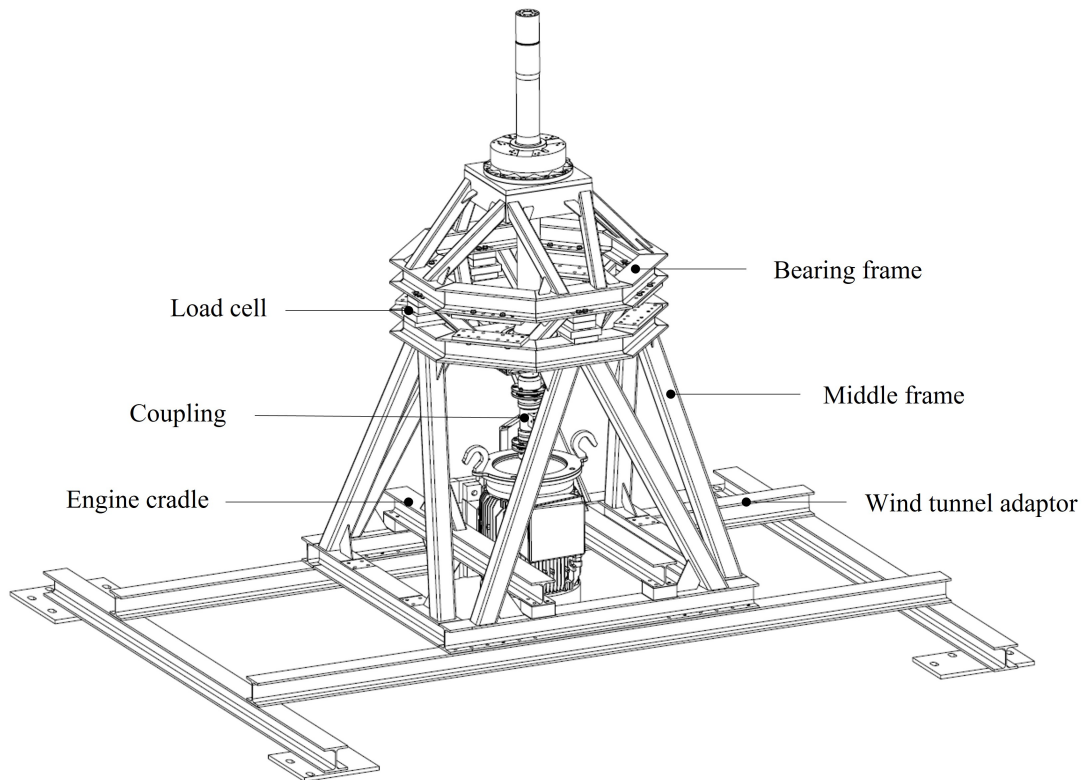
MERIT steel frame structure with drive train, bearings, and rotor shaft [22]
